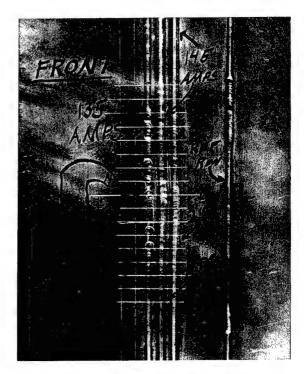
Effect of magnetic field on root of weld in 1/4-inch 2219-T87 aluminum weld.
